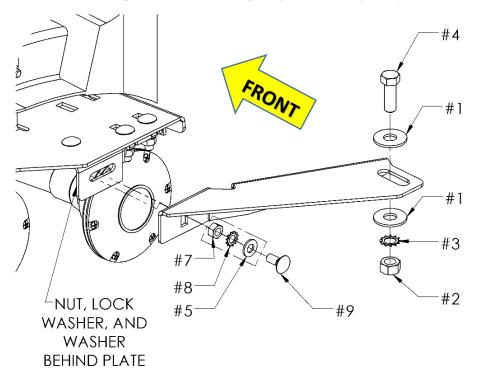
Air Tank Torque Strap with Hardware; Exploded View
